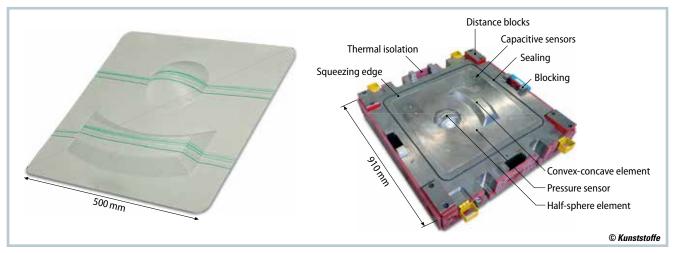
3D demonstrator part manufactured via compression RTM using the Elium resin (left) as well as the technology carrier tool and the tool carrier used for the manufacturing (source: IVW/Arkema)
